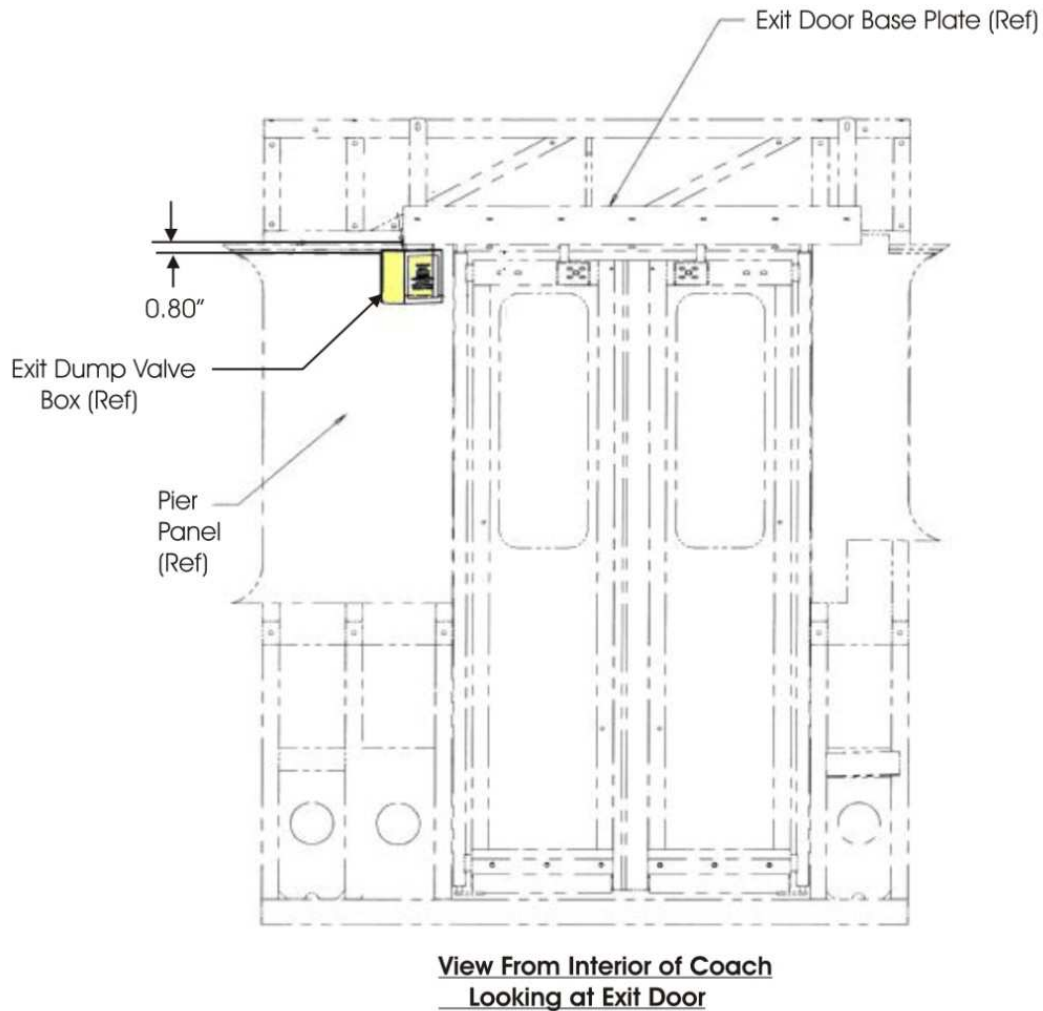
SHOWN INSTALLATION VIEW OF EXIT DOOR BASE PLATE. SECTION A VIEW
